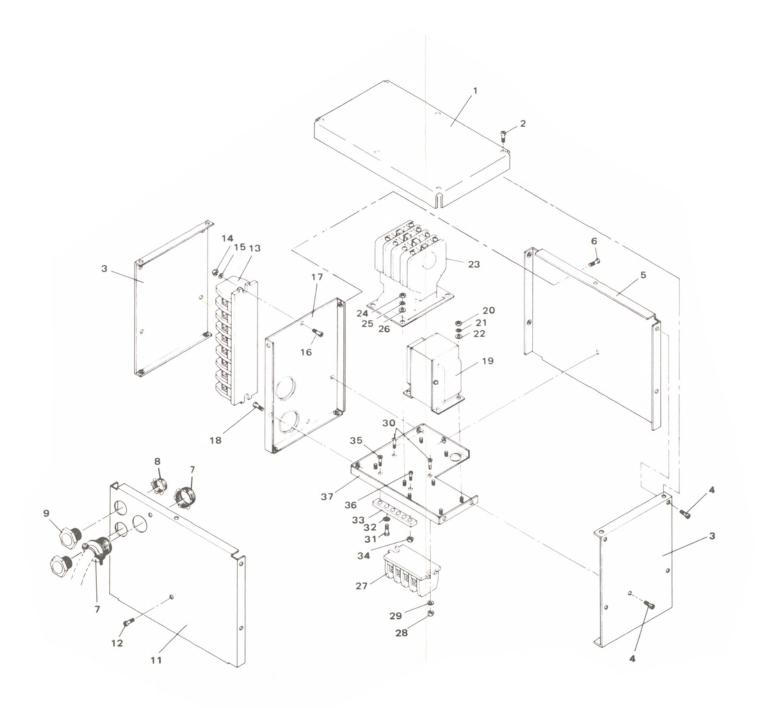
Exploded View Of Power Control Unit 4-17/4-18
